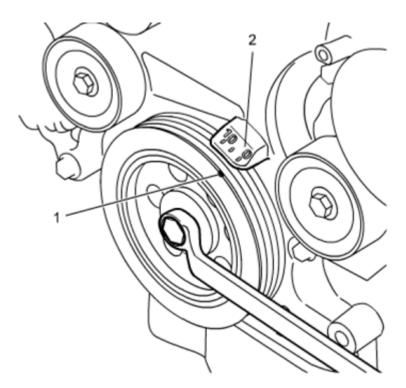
Aligning Notch Mark On Crankshaft Pulley With Timing Chain Cover Courtesy of SUZUKI OF AMERICA CORP.
